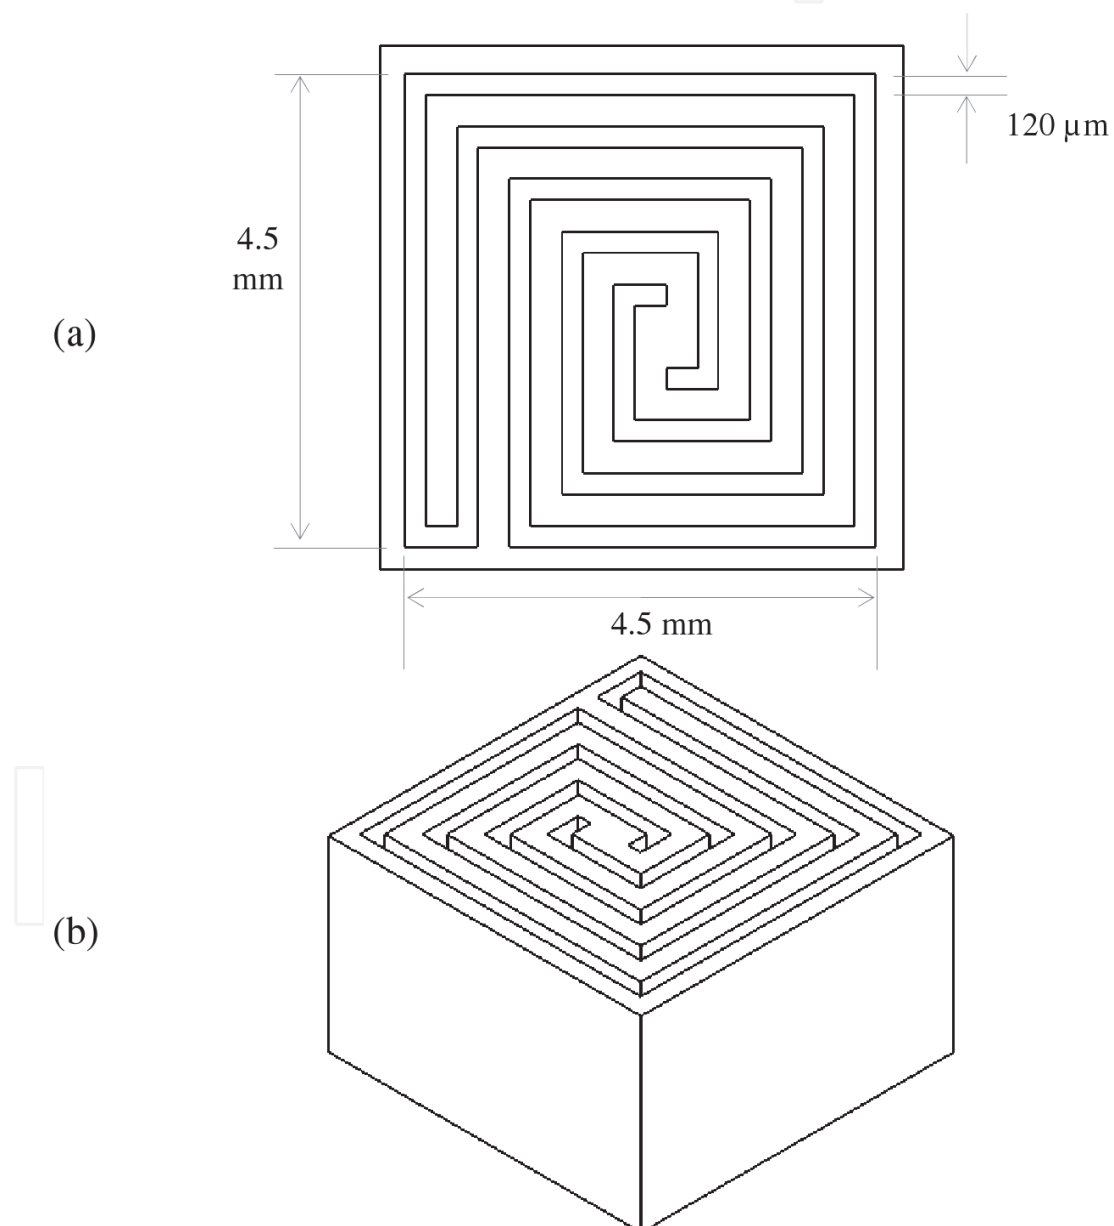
Proposed design of micro swiss-roll combustor mold cavity (a) top view and (b) isometric view
